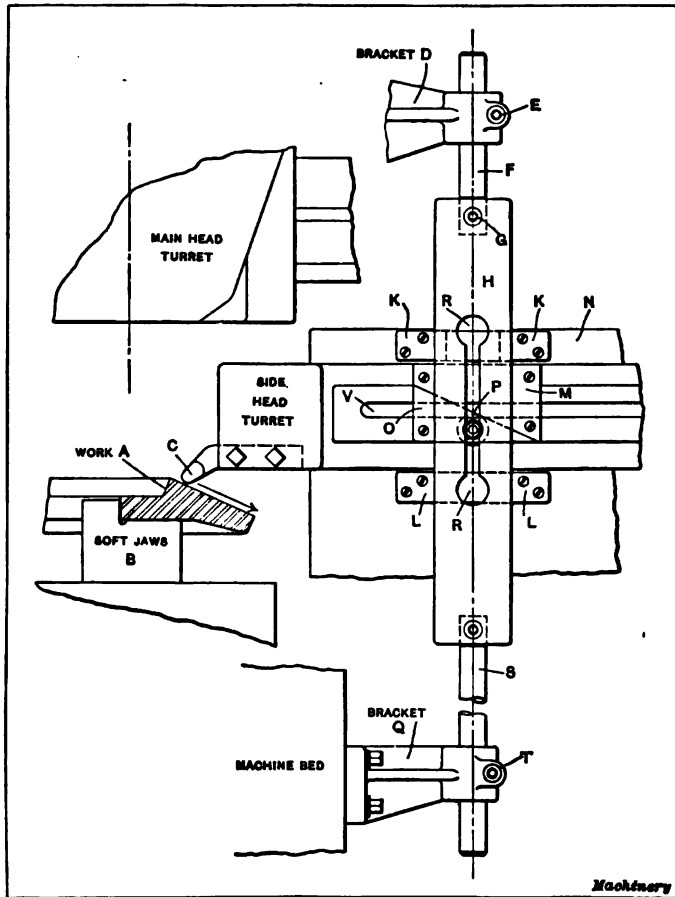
Taper Turning Attachment for the Bullard Vertical Turret Lathe
